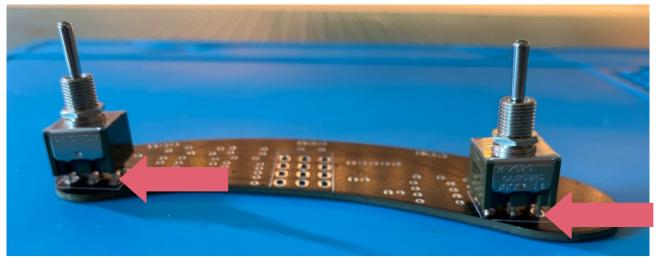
Lay PCB on a flat surface, with "GLOW" logo and silkscreen prints to the bottom. Stick 2 x 2PDT toggle switches into cutouts on PCB. Solder a single connection to one of the pins on each toggle switch from the top with the PCB still flat on the surface. There should be a distance of about 2-3mm between switch bottom and PCB. After soldering, carefully bend the switch to a upright position, if needed.
